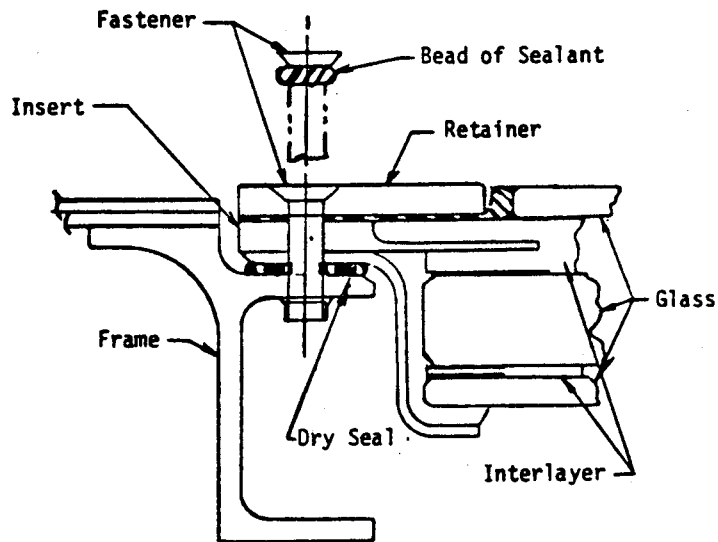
Edge Design for DC-9 Windshield
